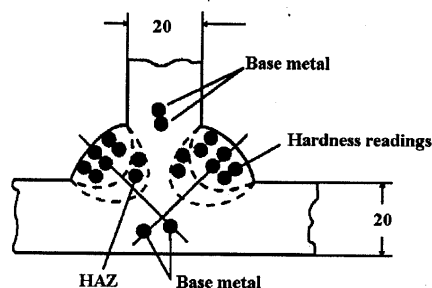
Hardness tests for fillet weld test
